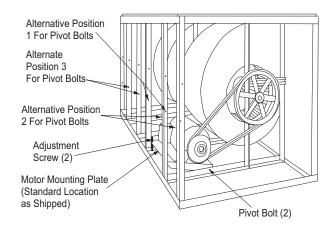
LB600 FACTORY MOTOR MOUNTING POSITION
